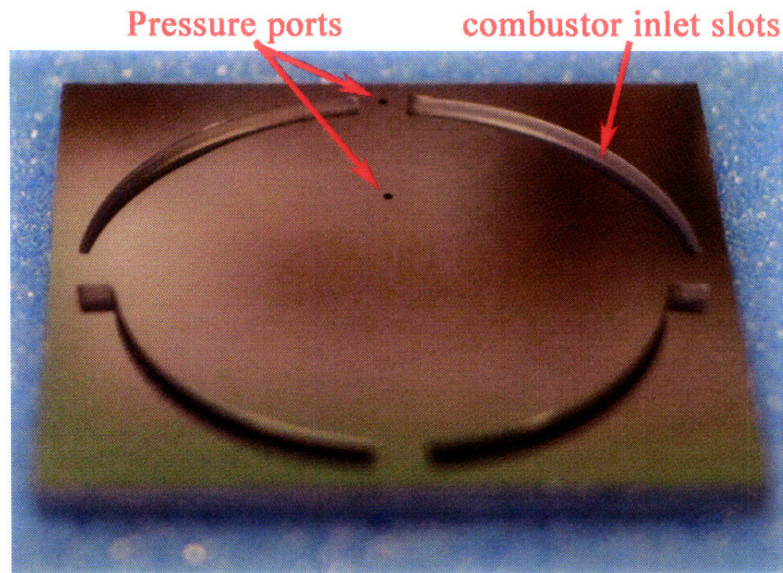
Back side of the completed silicon piece (showing the back side of Layer 4)
